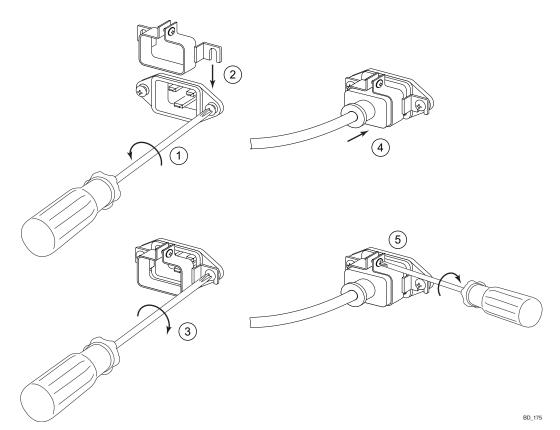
Connecting Power with the Clamp-Style Power Connector Retainer
